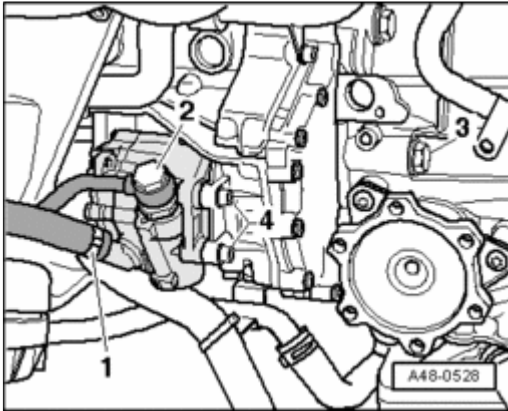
Clamping Sleeve From Suction Hose & Pressure Line
